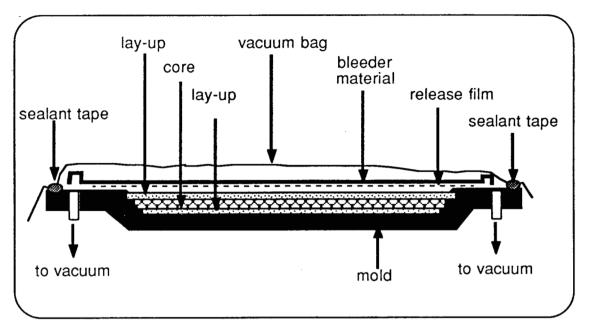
D.1 DIAGRAM OF VACUUM BAG MOLDING SETUP
